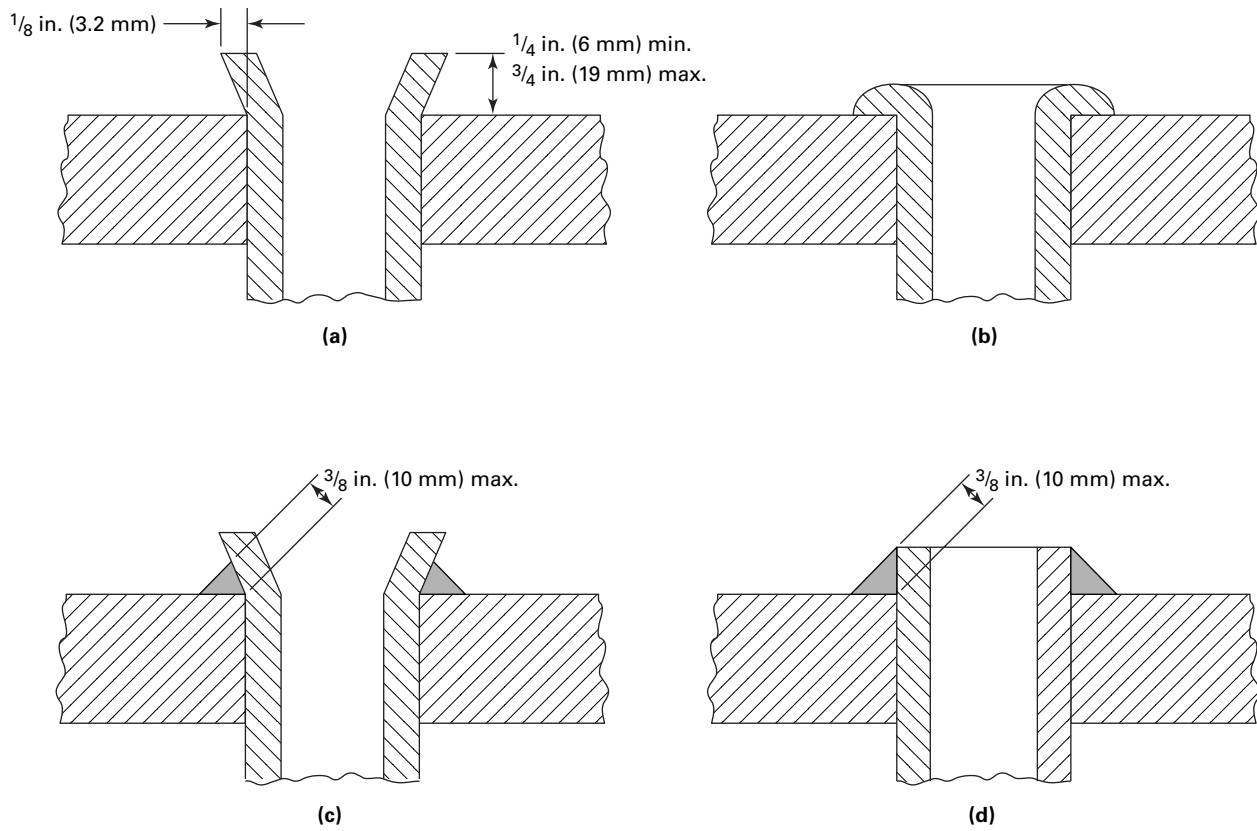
EXAMPLES OF ACCEPTABLE FORMS OF TUBE ATTACHMENT
